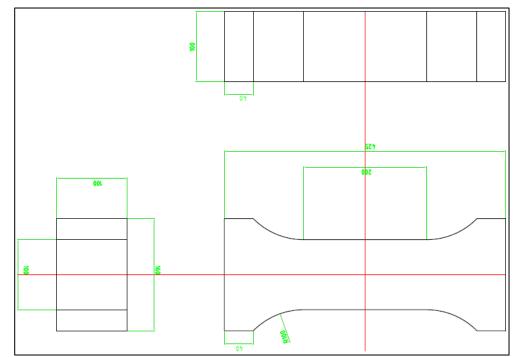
Shape and dimensions of the specimens designed for direct tension tests (unit: mm)
